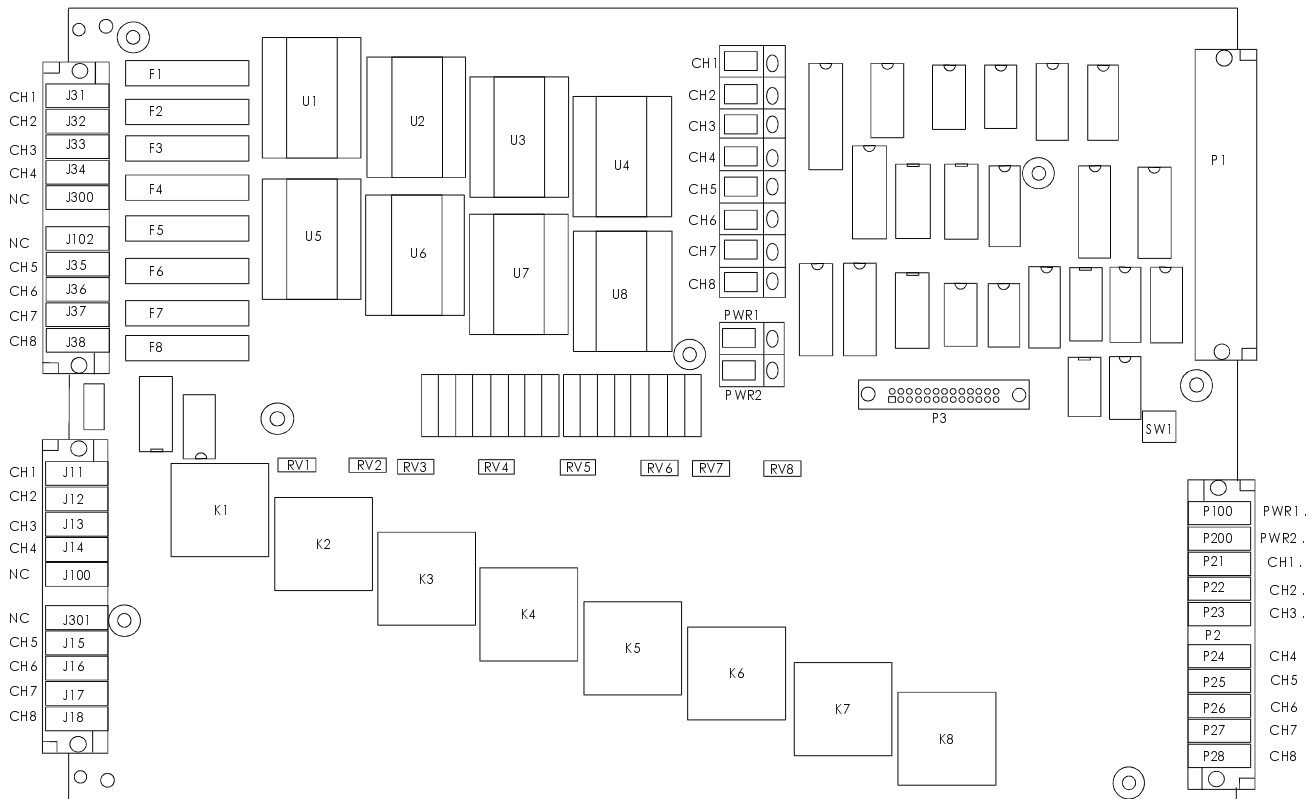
HP E6178B 8-Channel Heavy Duty Load Card Component Locator
